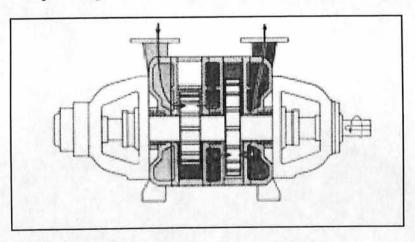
Liquid ring compressor two-stage (Courtesy: H. Bannwarth; Liquid Ring Vacuum Pumps, Compressors and Systems)
